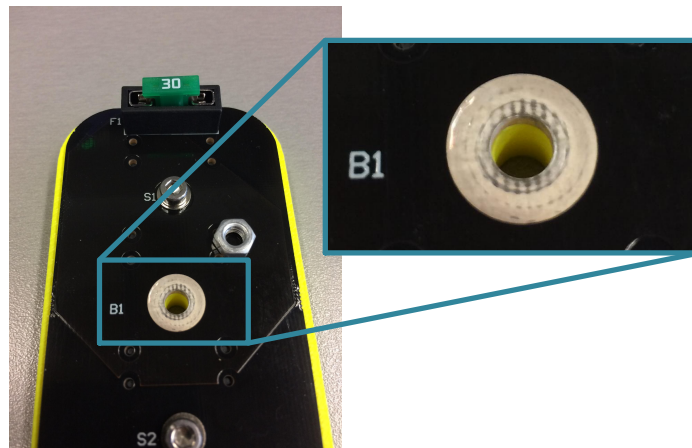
Close up photograph of the top PCB disassembled, with aluminium securing nut placed on top.
